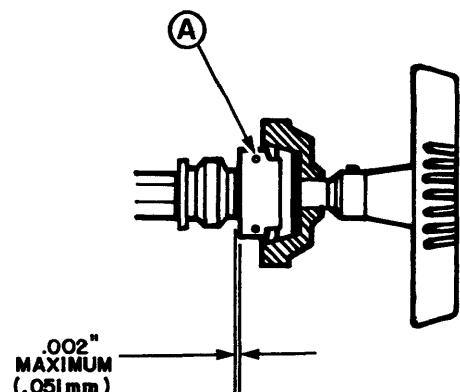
Variable Adjust Platen Knob's End Play Adjustment
